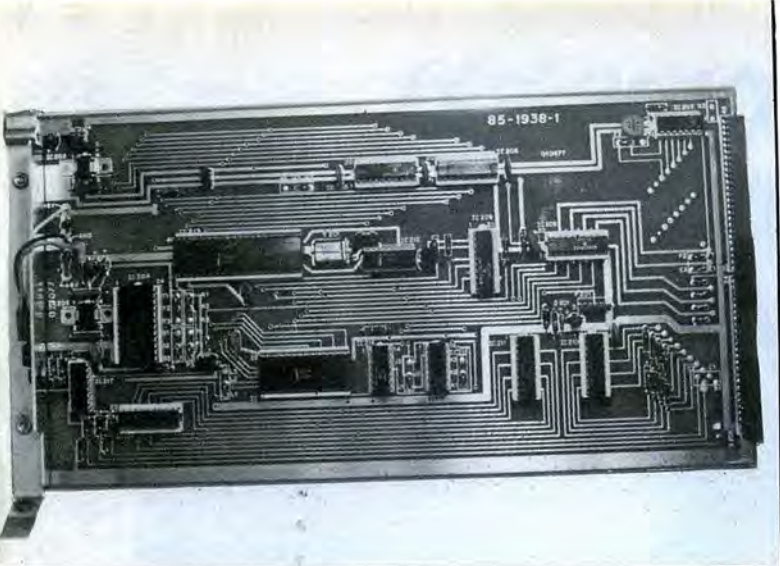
The H8 CPU board. 50-pin connector socket is at right; voltage regulator heat sink/card support bracket is at left.
